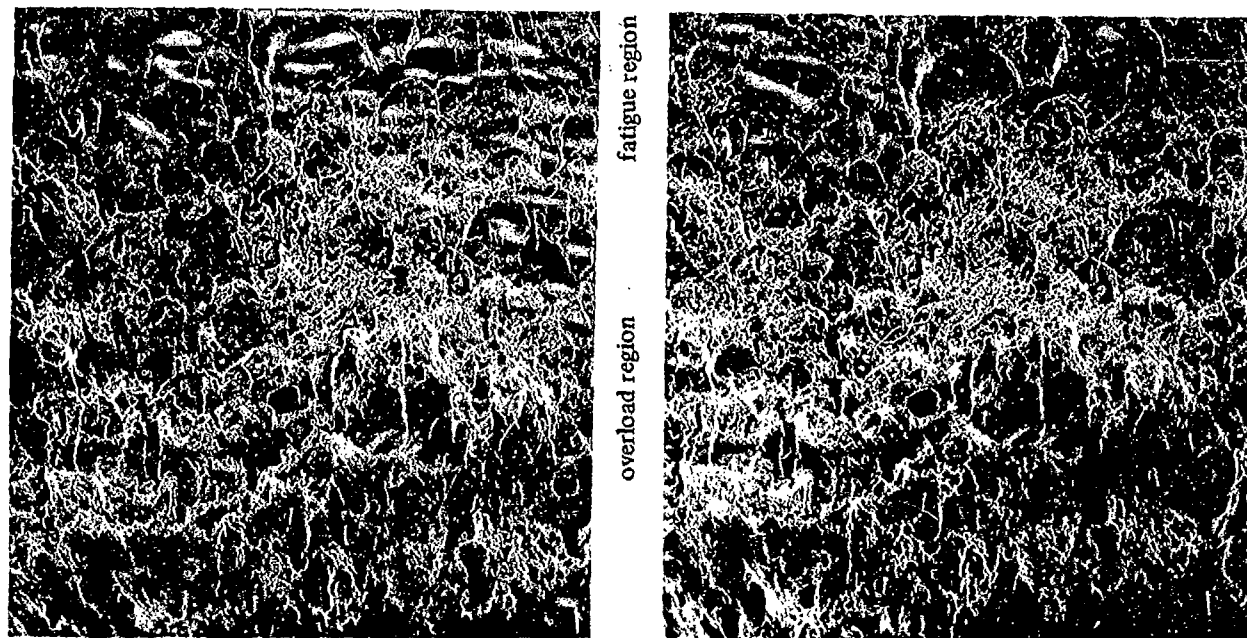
Stereo micrograph of fatigue region in a hydrogen-embrittled AX-110 weld specimen, 40x.
